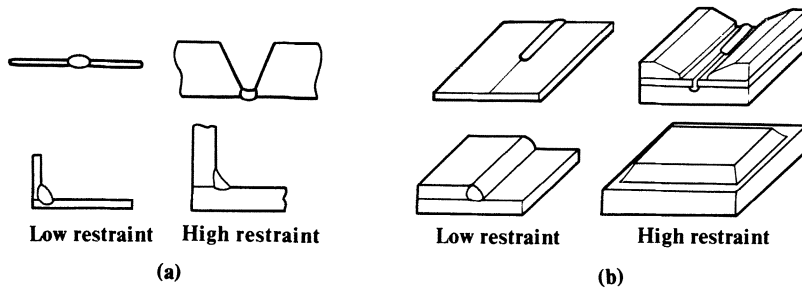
(a) Restraint dependent on dimensions of weld and plate; (b) restraint dependent on rigidity of joint or set-up.
